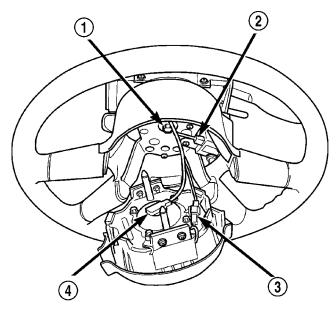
Lower Driver Airbag Pin Retaining Clip Removal/Installation
